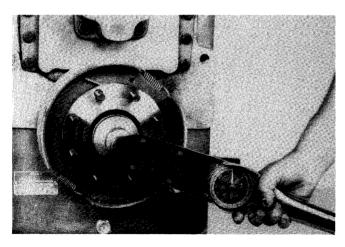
Tighten lock nut to specified torque. (See elastic stop nut torque chart).
